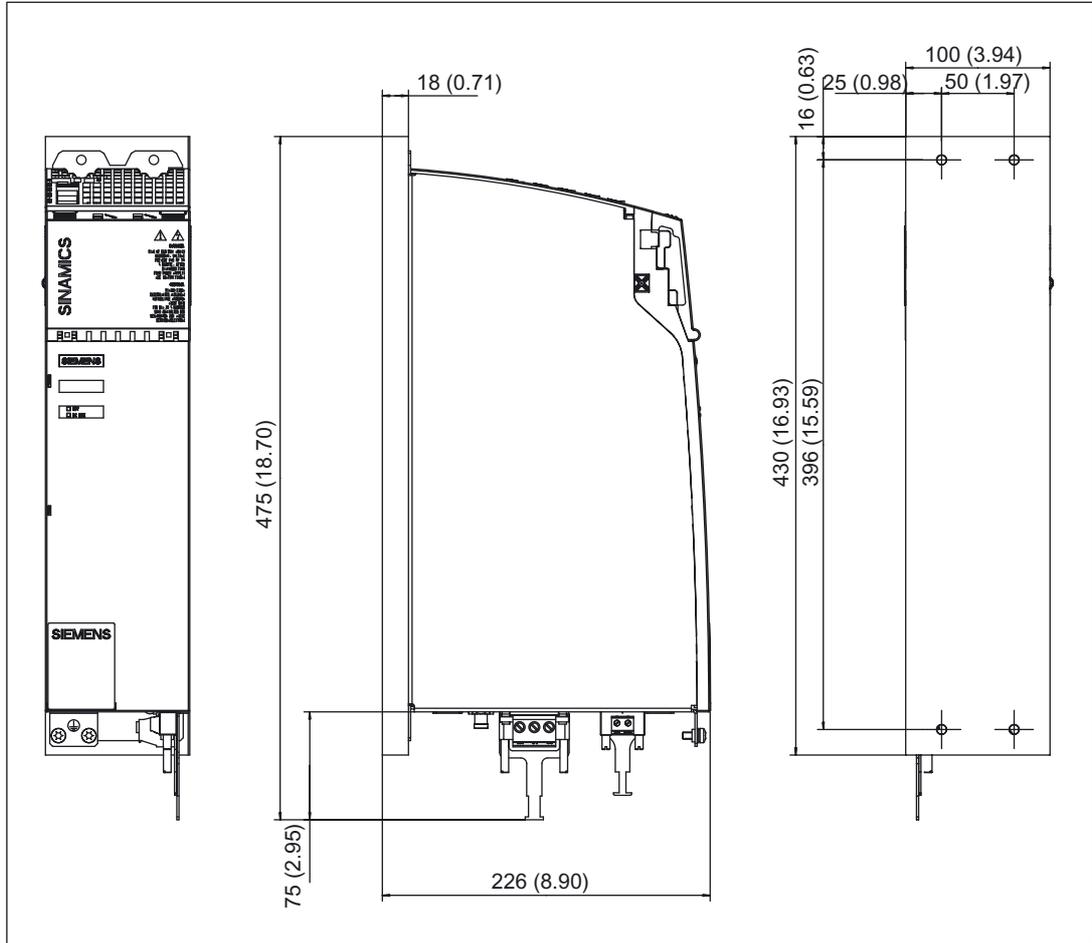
Dimension drawing of Basic Line Module with cold plate (20 kW), all dimensions in mm and (inches)
